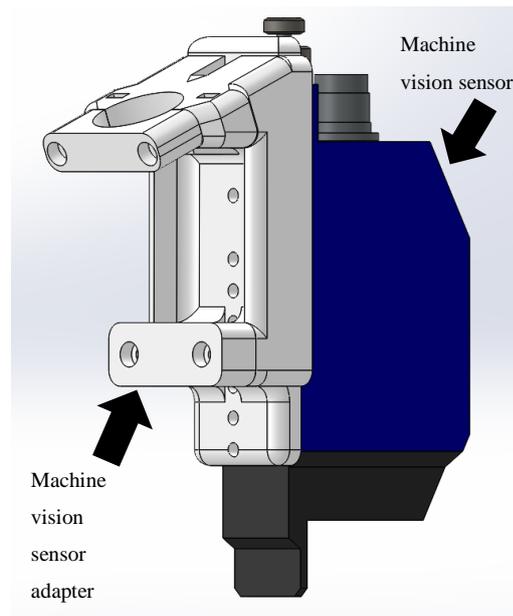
CAD-model of machine vision adapter and machine vision sensor, height 135 mm, width 50 mm and depth 70mm.
